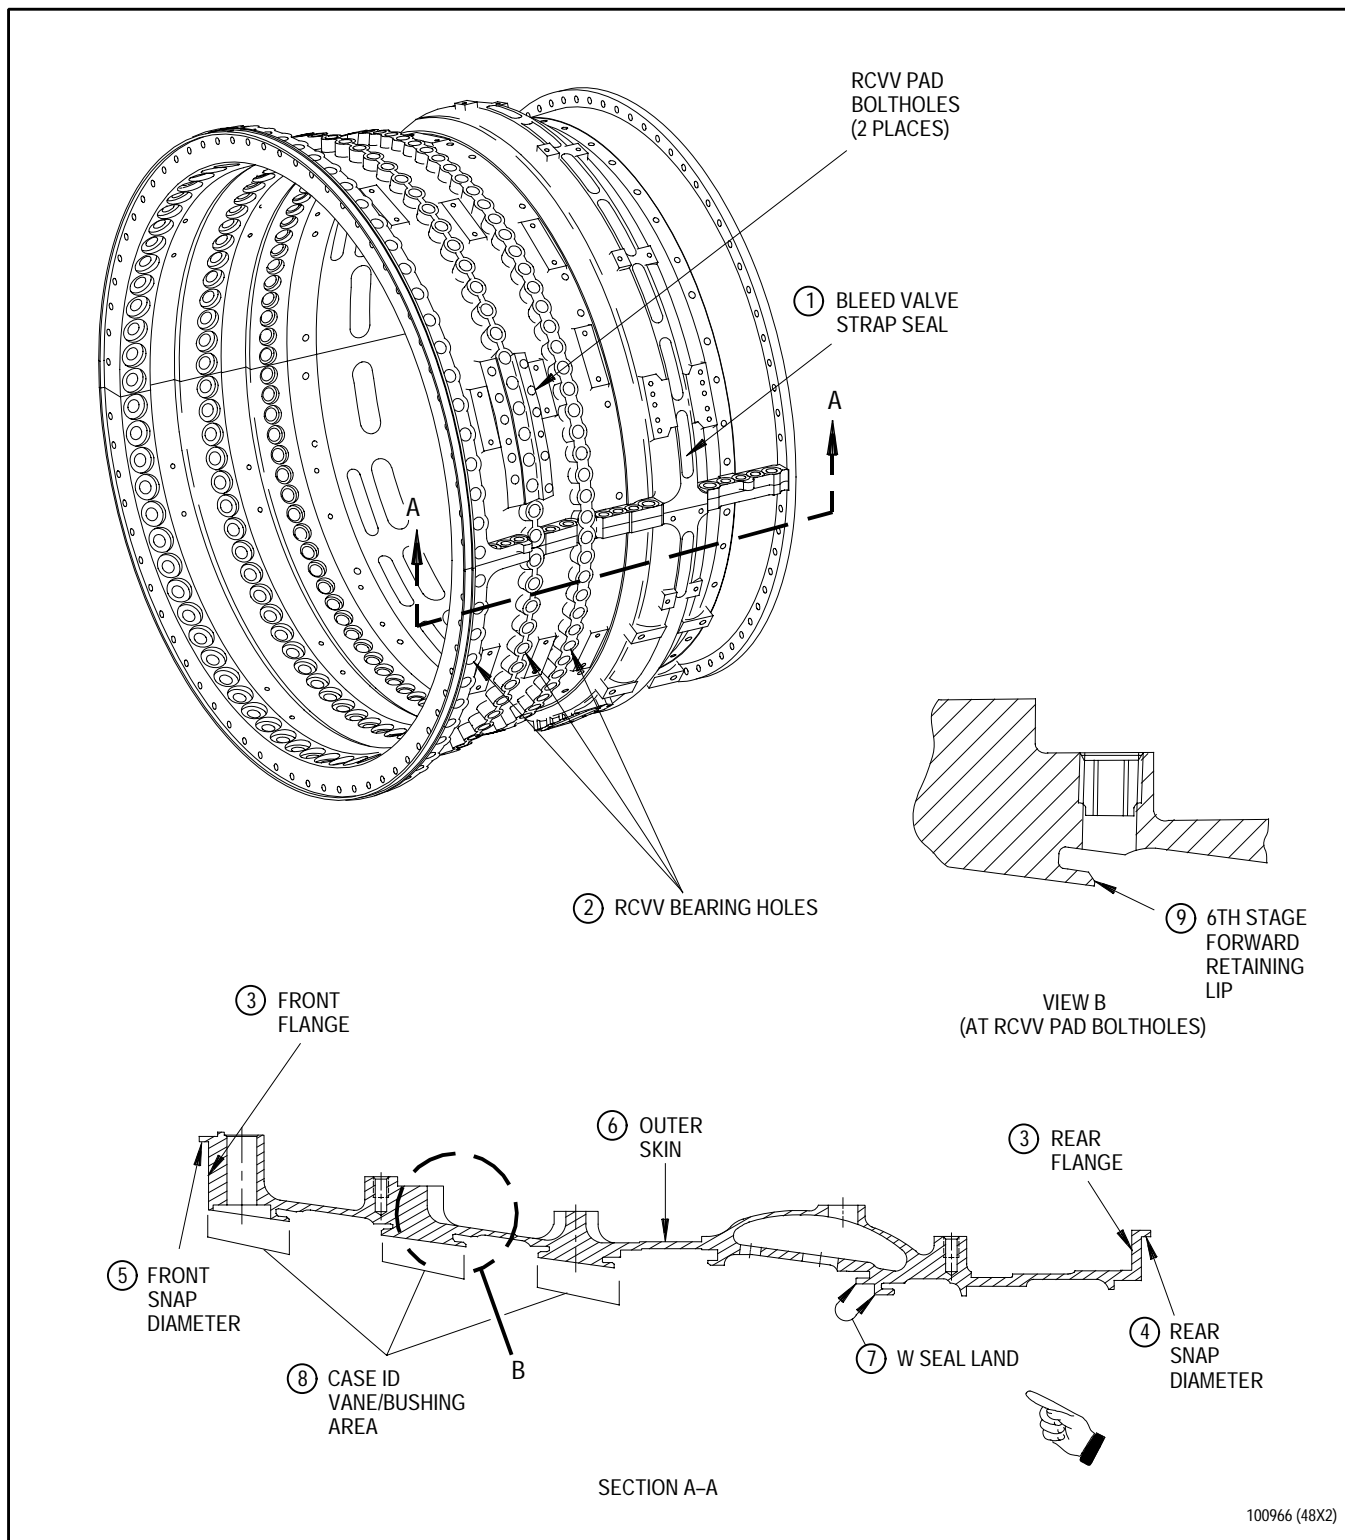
Fourth Through Ninth Stage Compressor Case Set - Inspection (Sheet 1 of 3)
